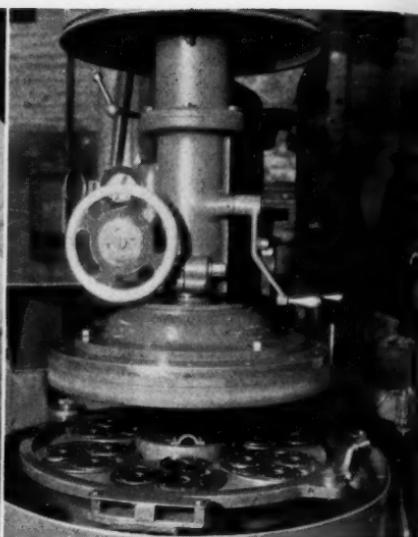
Norge compressor "Rollators" are lapped in this Norton Lapping Machine. Fig. 13—Cast iron cylinder suction discs are lapped to size in this machine. A flood of oleum spirits expedites the operation.
